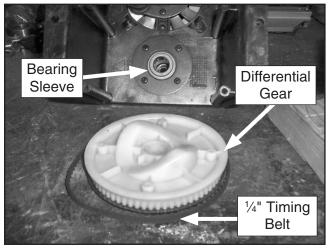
Location of bearing sleeve, with differential gear and ½" timing belt removed.
